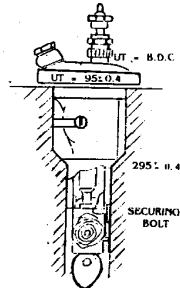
Flange mounting designs used with robert bosch type bp pump.
